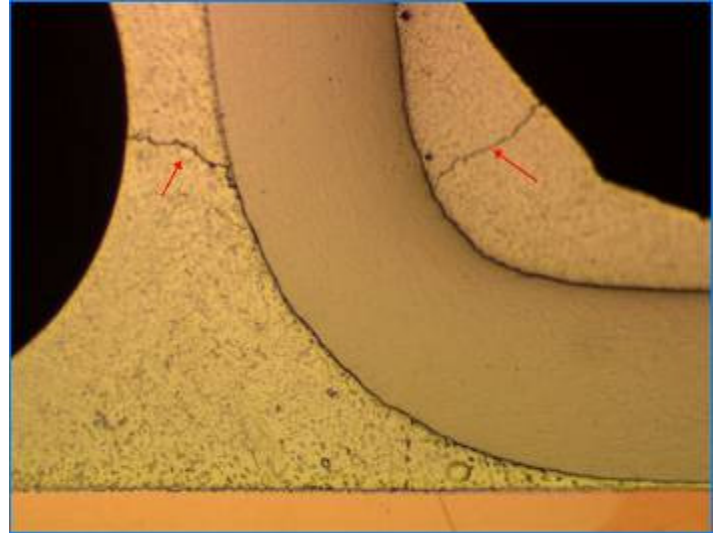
cross section, SN68, U16, right lead solder partial crack, 200x
